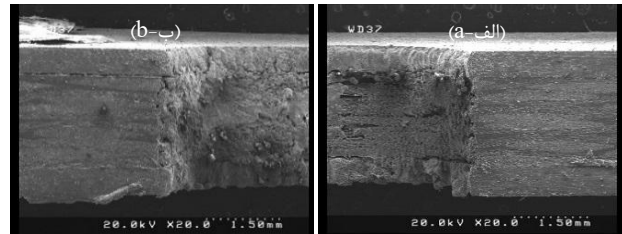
The cross-section of a hole cut at a power of 3.5 kW, with an assist gas pressure of 8 bar and a feed rate of 6600 mm/min; a) Right side of the hole. b) Left side of the hole.
